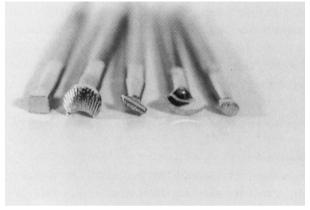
Close-up of heads of five stamping tools: (left to right) beveller, camouflage tool, backgrounder, veiner, ridged pear shader.
